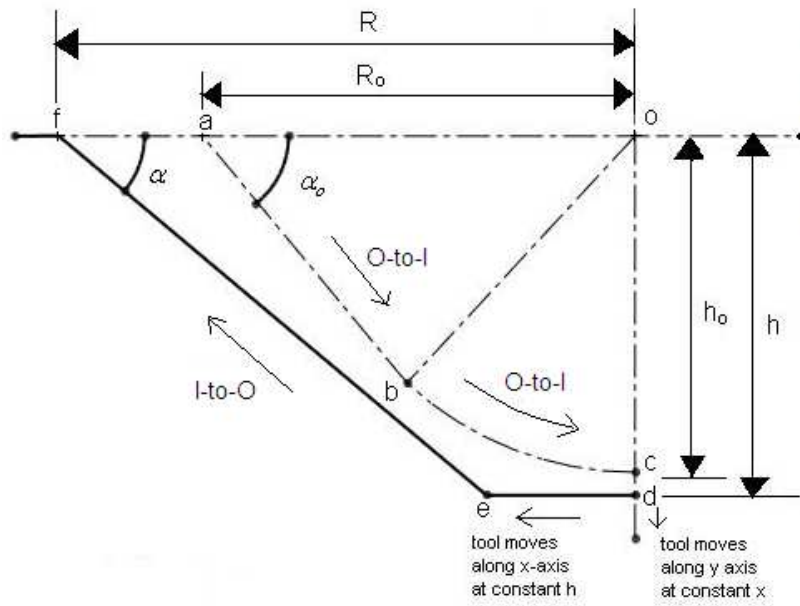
Sectional view to show *O-to-I* and *I-to-O* Toolpath for bottom fillet cone type intermediate profile
